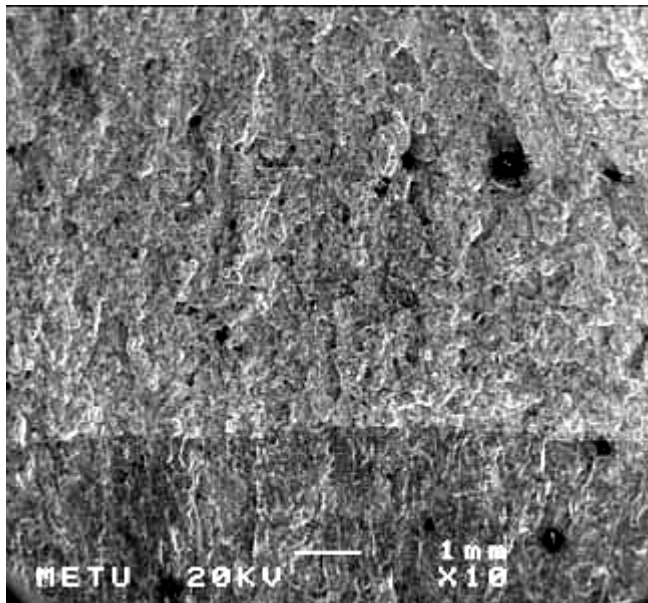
General view of fracture surface of 7050-T73651 alloy in SL orientation.
